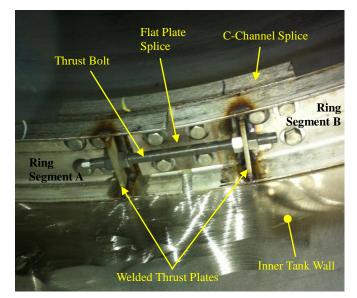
FINAL BOLTED JOINT ASSEMBLY (3 PER RING)
